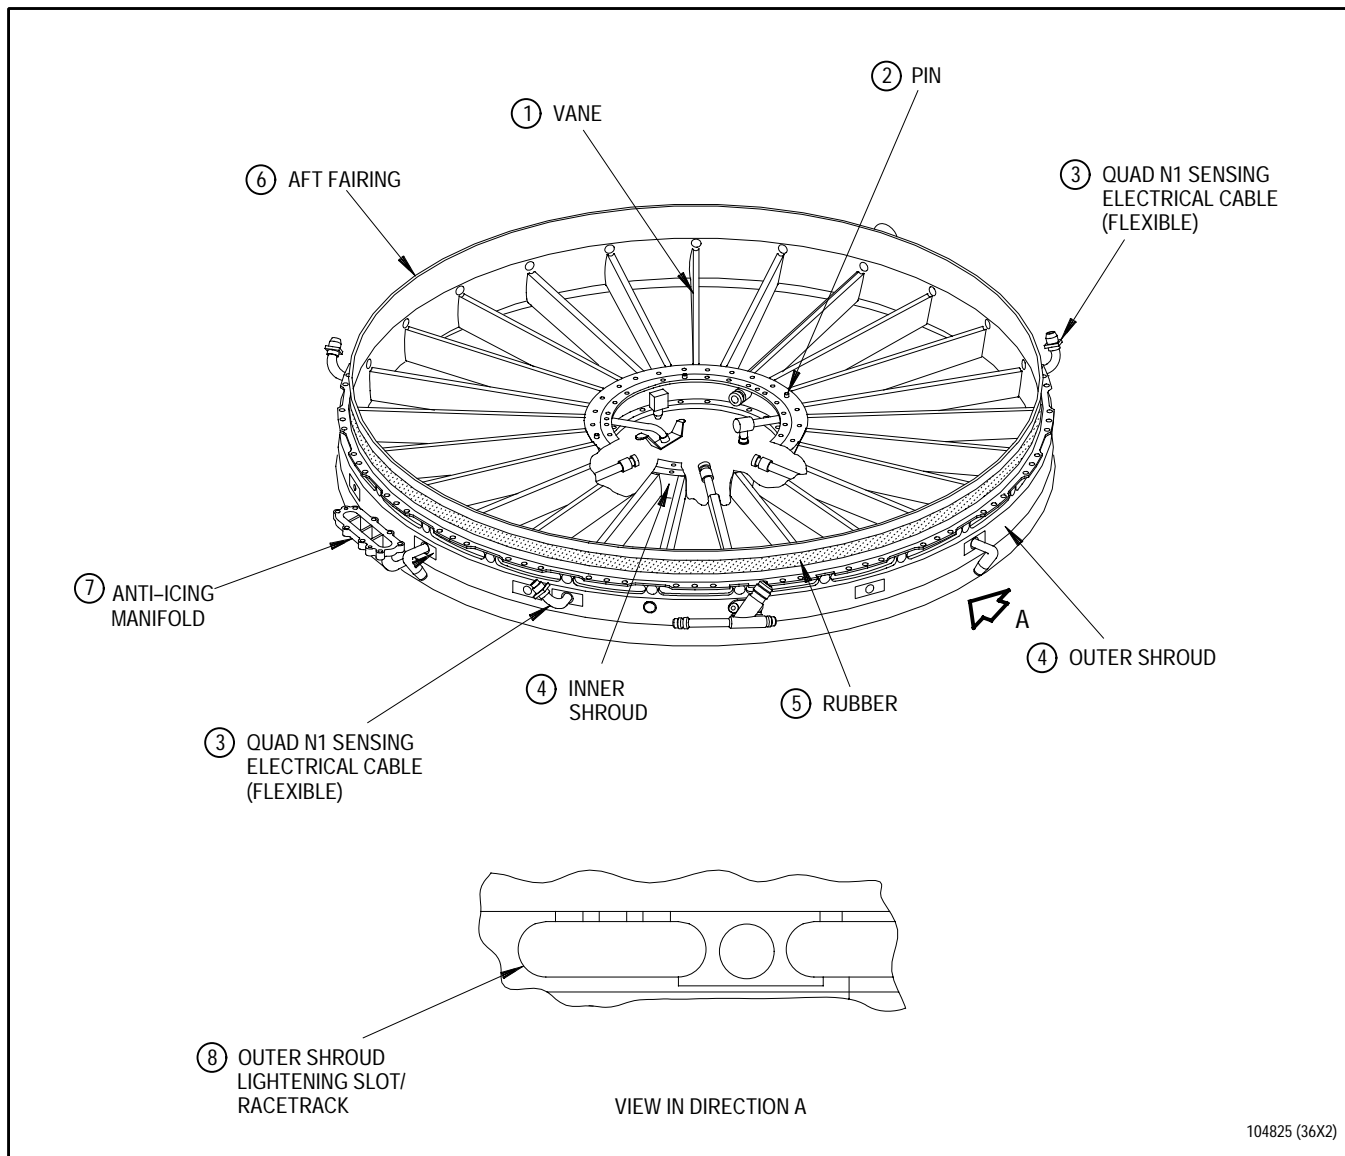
Fan Inlet Case Assembly - Inspection (Sheet 1 of 2)
